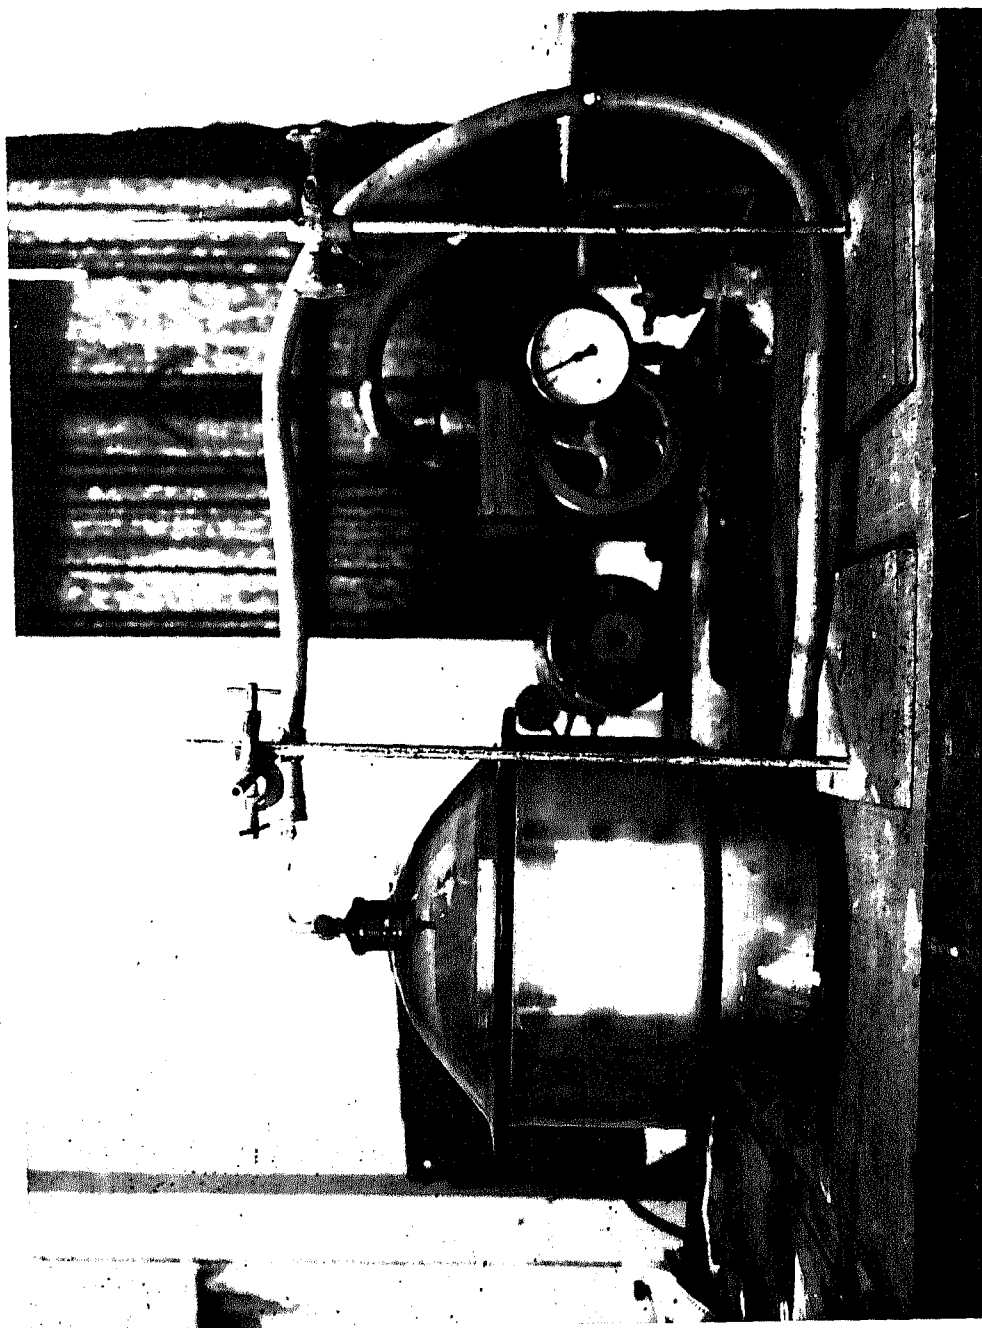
A mould in the vacuum chamber to remove entrapped air.
